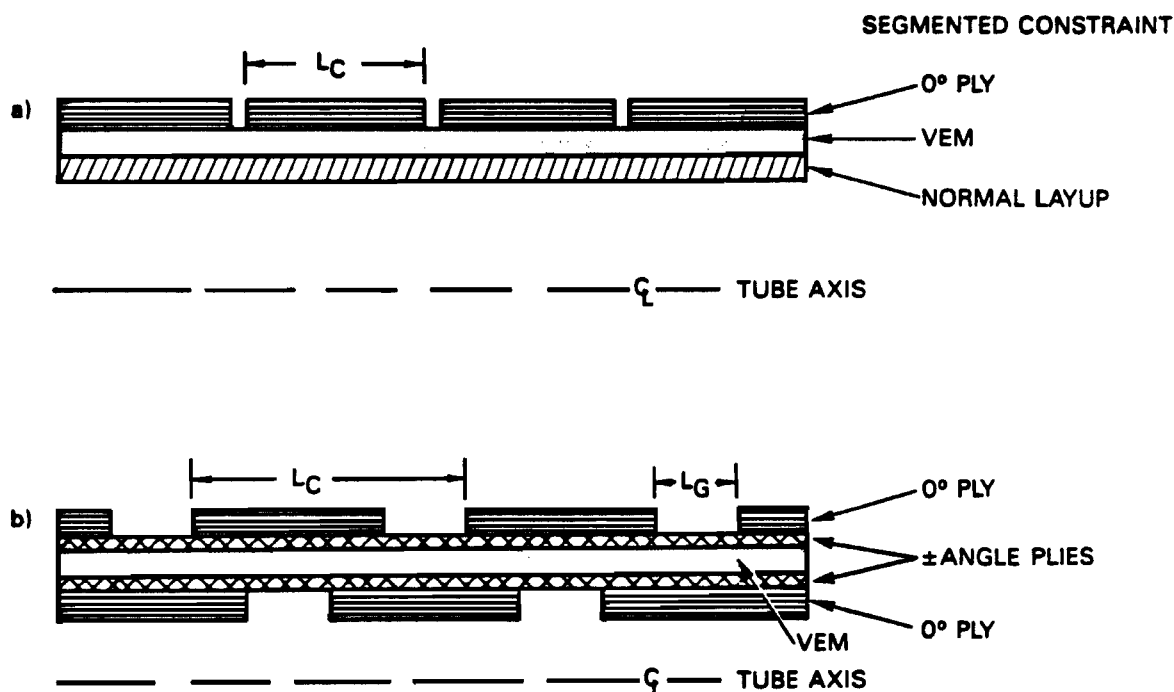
Layup Details and Geometric Design Variables for: a) Uniform Segmented Constraining Layer and b) Alternating Ply Concept.
